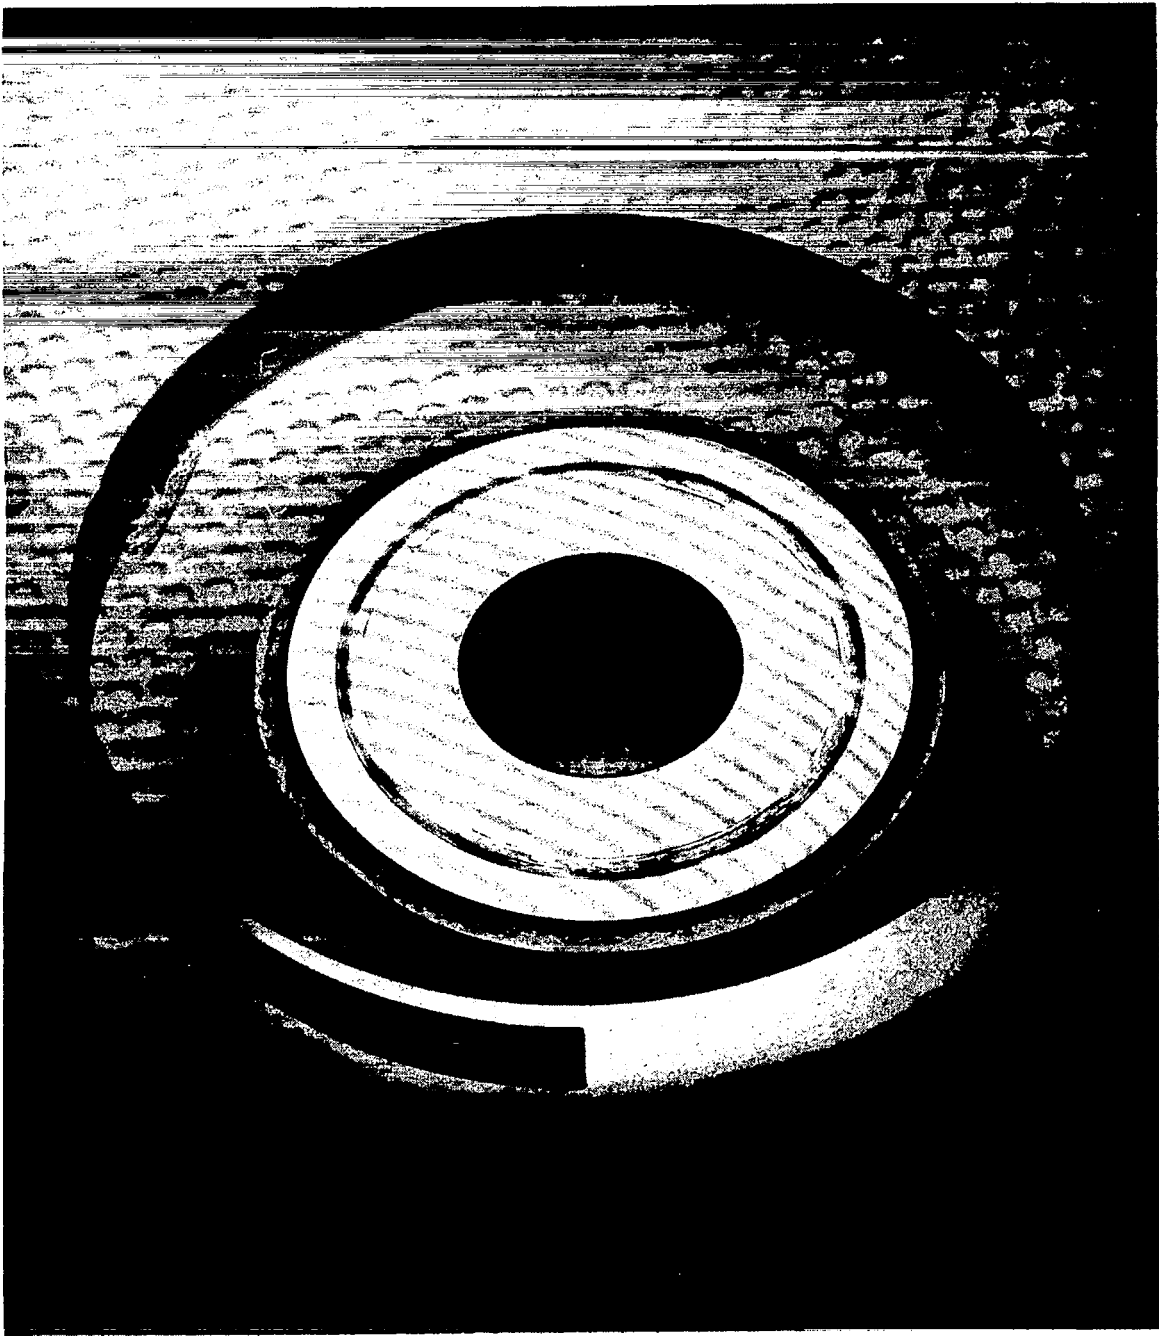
Turbine-Compressor Sealplate under Optical Flat after 500 Hours of Test
